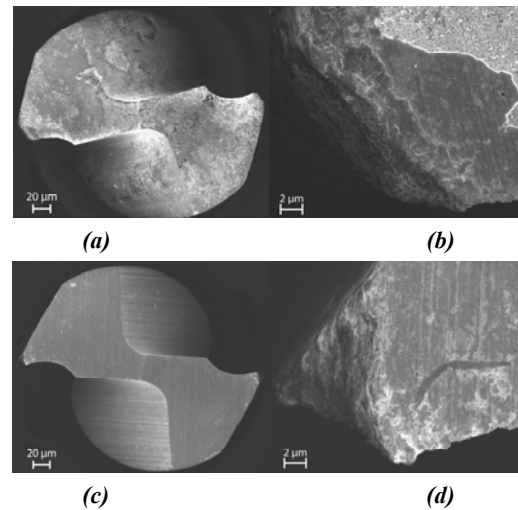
Comparison of: (a) an NCD coated end mill after initial cutting edge fracture, (b) an NCD coated cutting edge after fracture, (c) a bare WC end mill after cutting edge fracture, and (d) a bare WC cutting edge after fracture.
